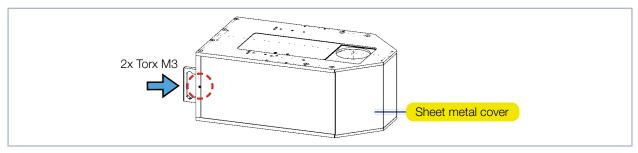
Removing/mounting the sheet metal cover on the PowerMonitor PM 100
